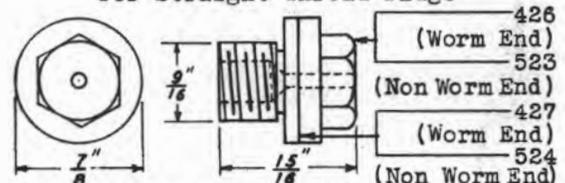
Filling Plug - Collar H. Plug (Vented Plug)
